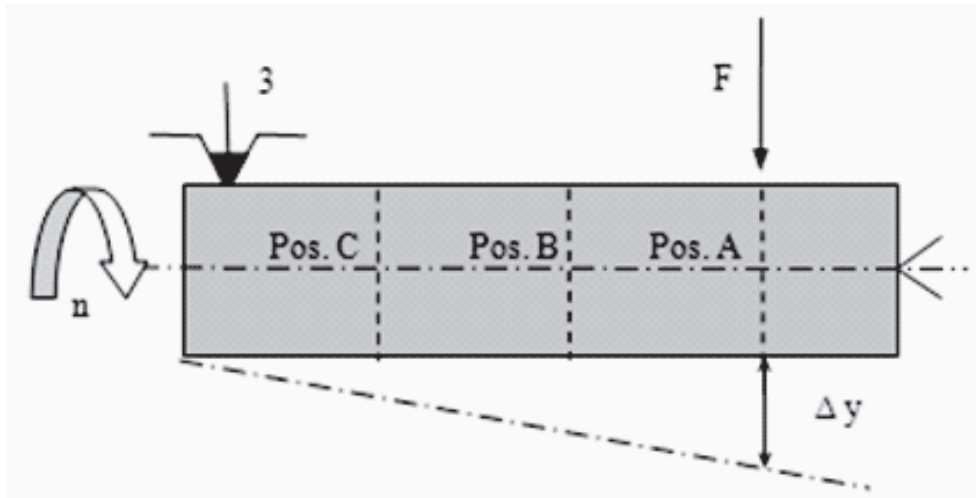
Scheme of measurement of the workpiece – turning turret subsystem static stiffness (own elaboration)
